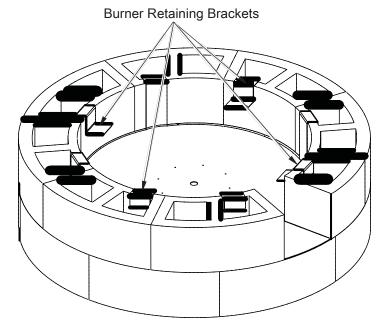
Burner Retaining Brackets (MM2FR Shown)
